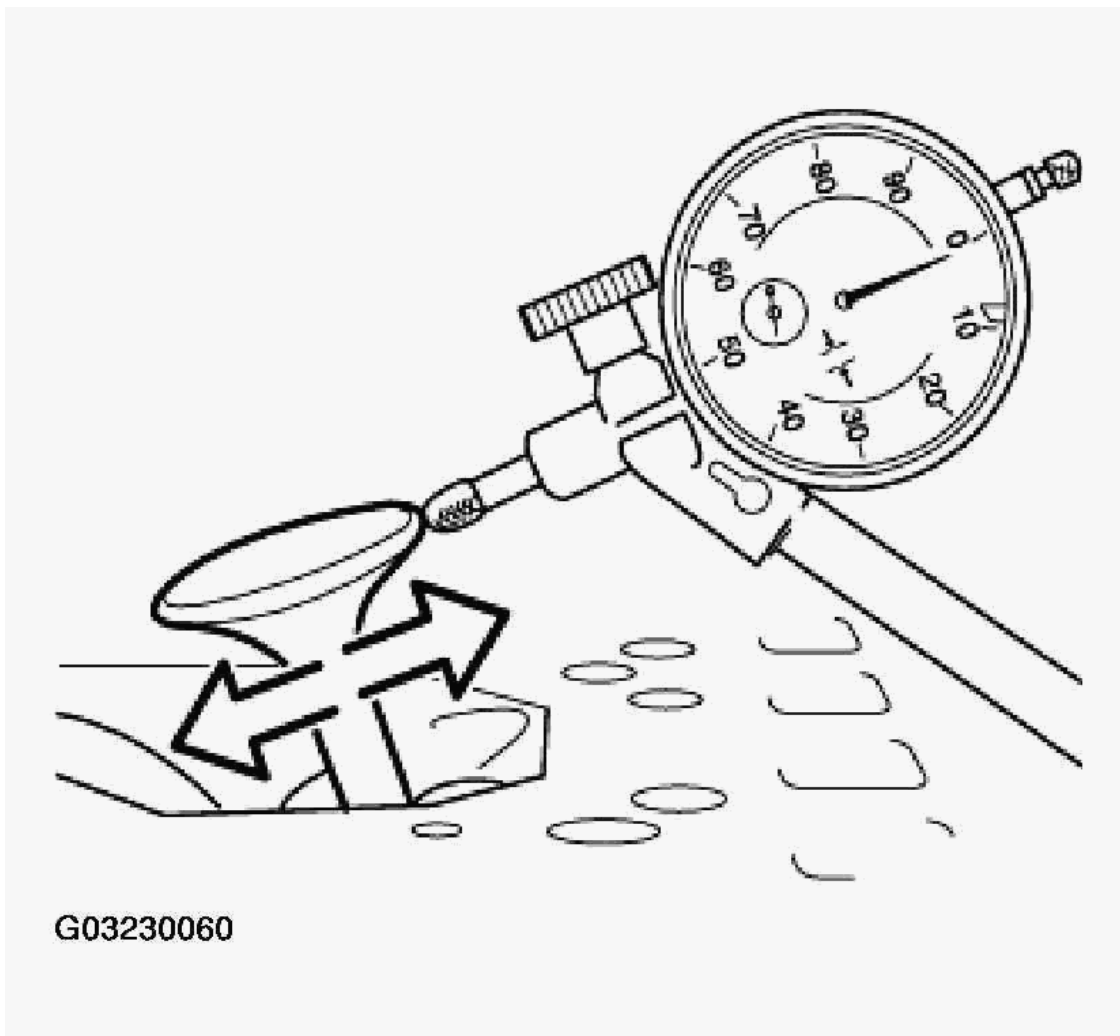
Measuring Tilt Clearance With Dial Gauge
